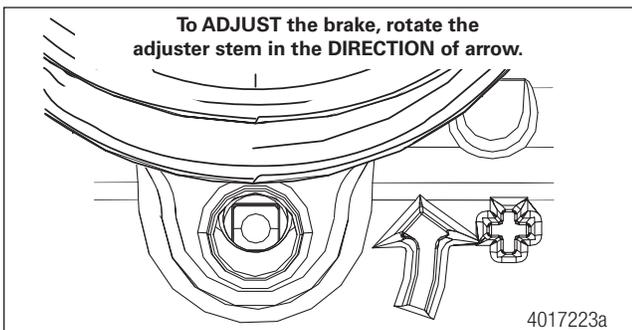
Adjustment Arrow Cast into the Caliper Housing (RH)
